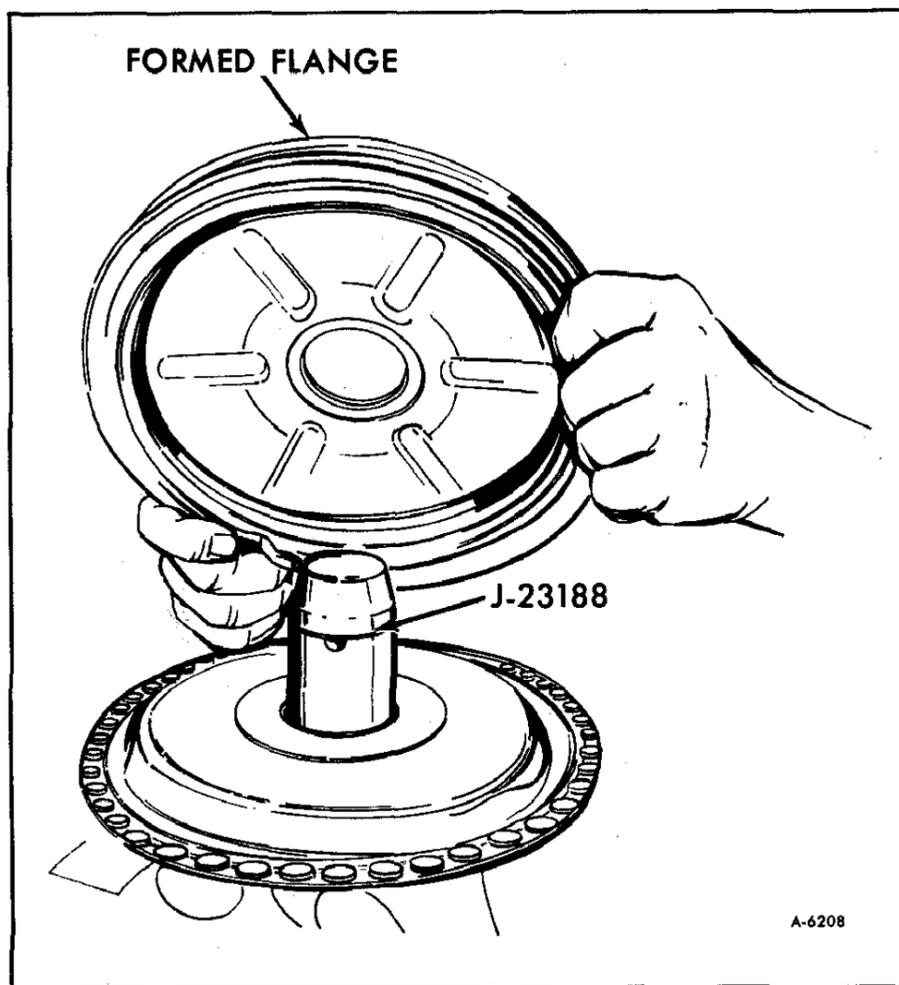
Positioning Housing Divider Over Secondary Bearing Protector Tool J-23188
